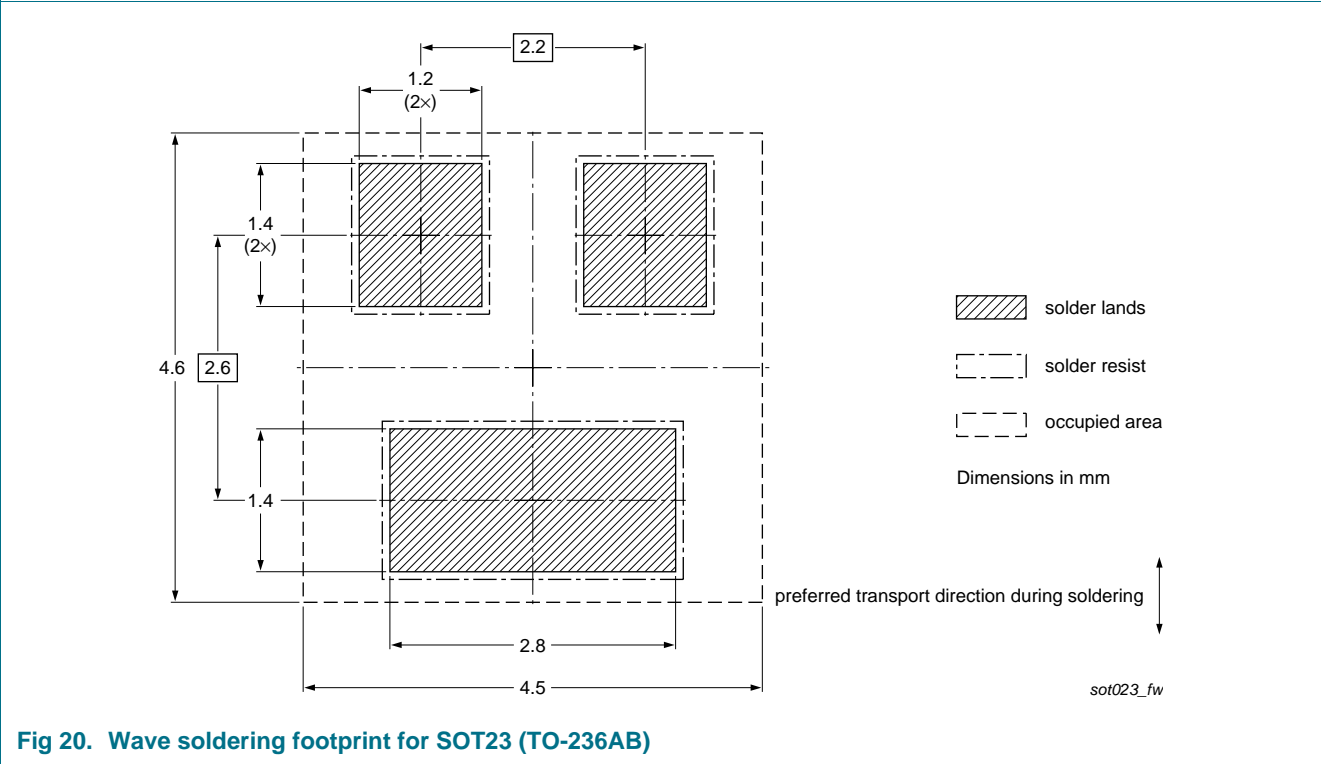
Wave soldering footprint for SOT23 (TO-236AB)
